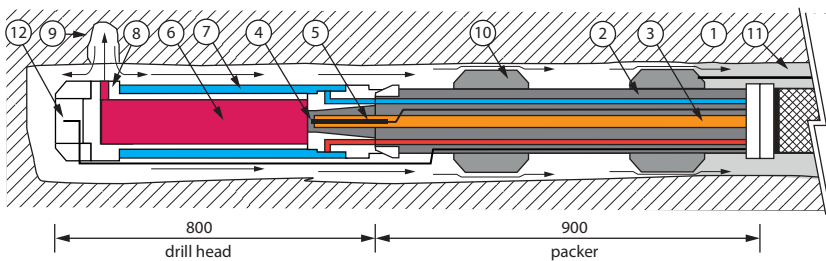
(c) Illustration of the bottom hole assembly with the packer system, drill head and nozzle.
